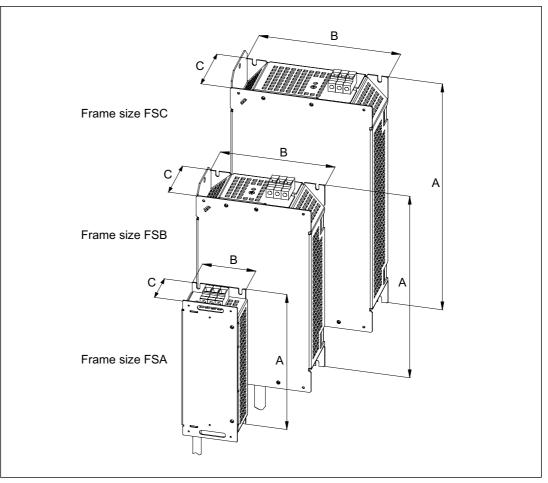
Dimension drawing of line reactors, frame sizes FSA, FSB, and FSC
